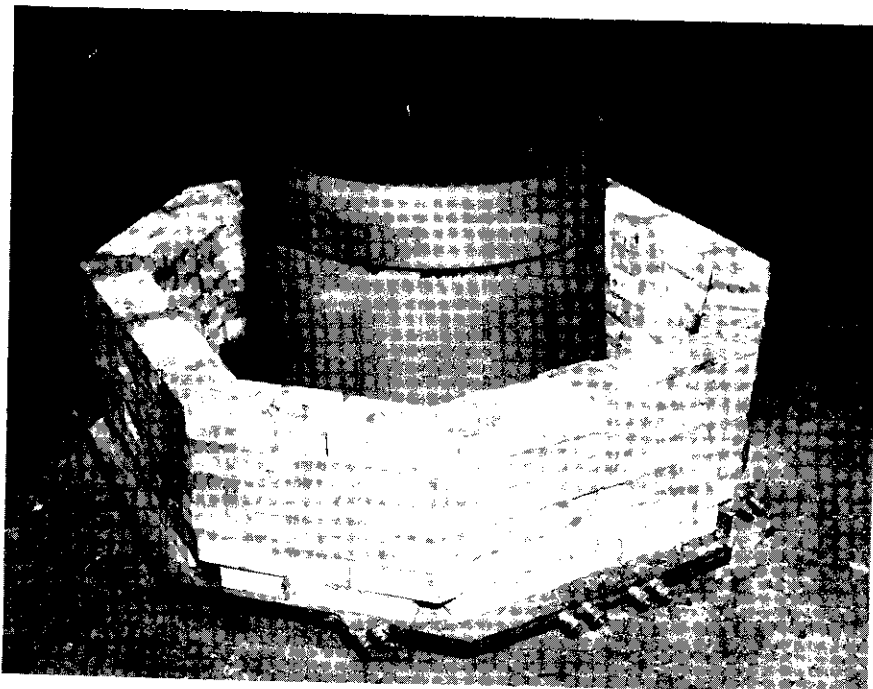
Partial Assembly for Hot Working, Bottom Punch, Bottom Platen and Brick Foundation
